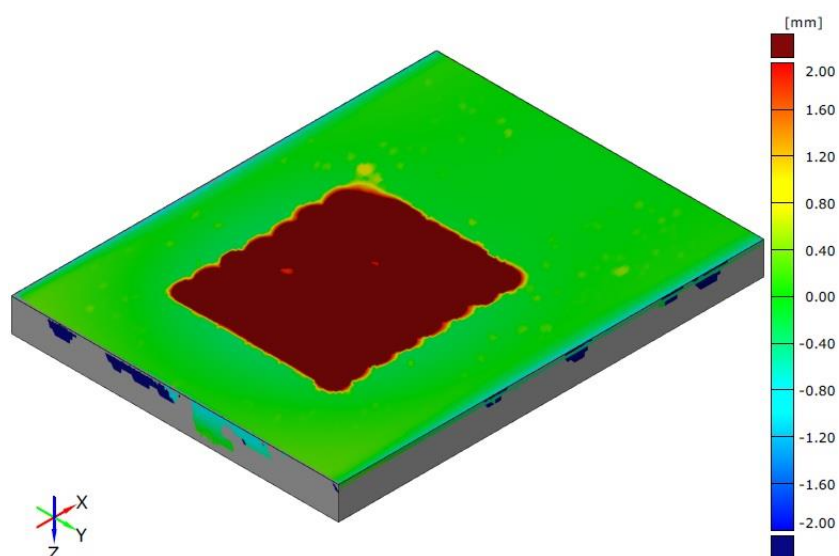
Scanned surface deposited with welding parameters of wire feed rate 4m/min and 17V
